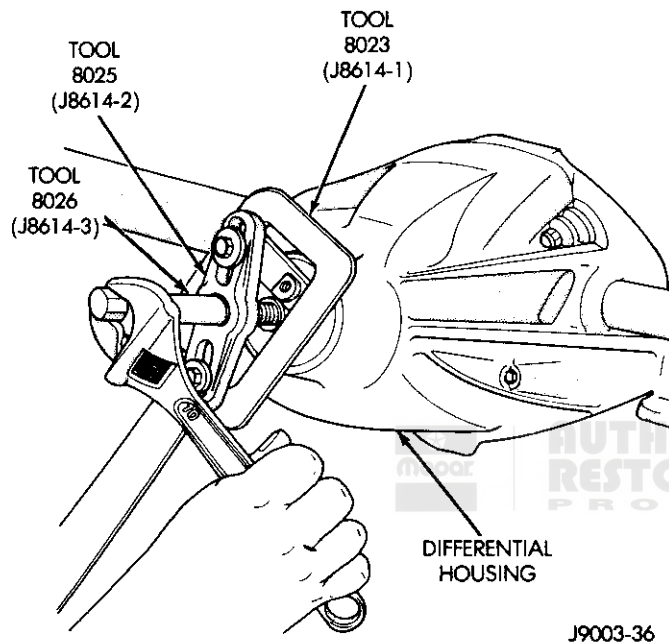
Drive Pinion Gear Shaft Yoke Removal
